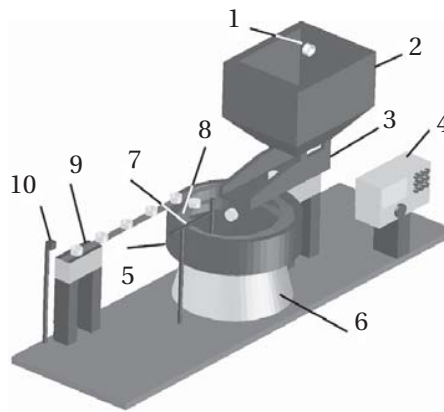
Parts feeding system using vibratory bowl feeder [65]
